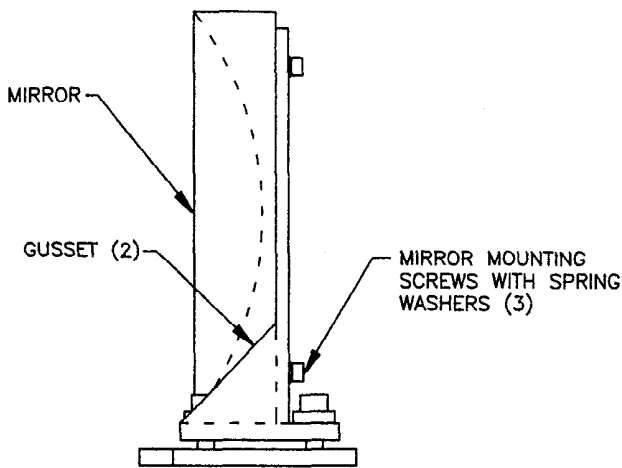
Side view of the assembly showing a reinforcing gusset and the screws holding the mirror to the mount.
